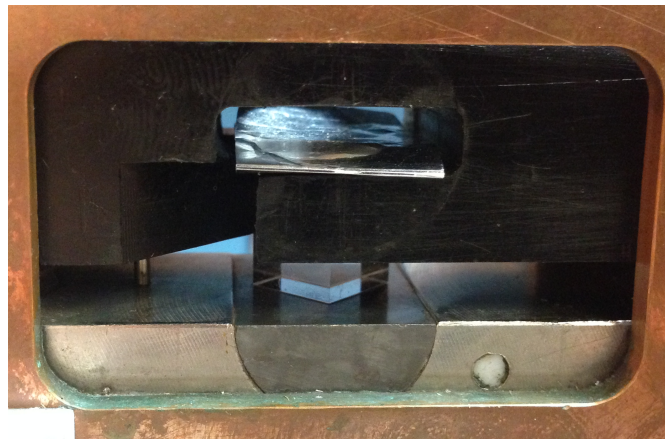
Assembly step 4. Mantel in raised position with foil inserted.
